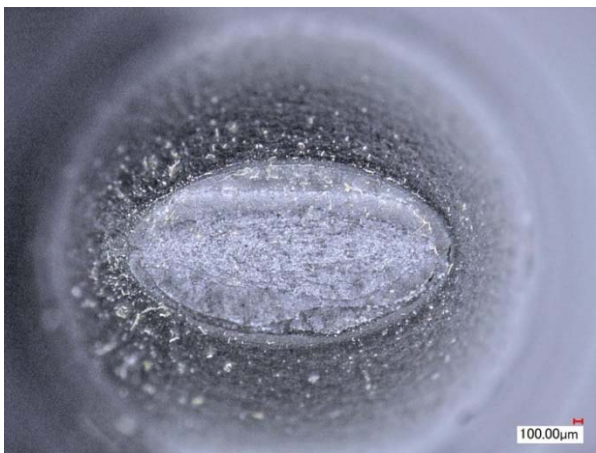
Fracture surface for as-rolled longitudinal tensile test specimen.
